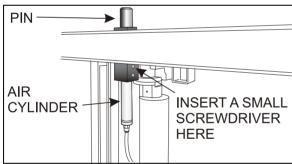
SECURITY PIN AIR CYLINDER REMOVAL
